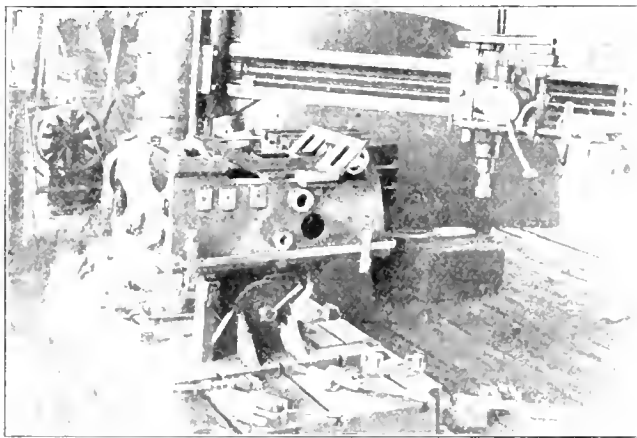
Universal Fixture Set for Drilling Top of Bed
